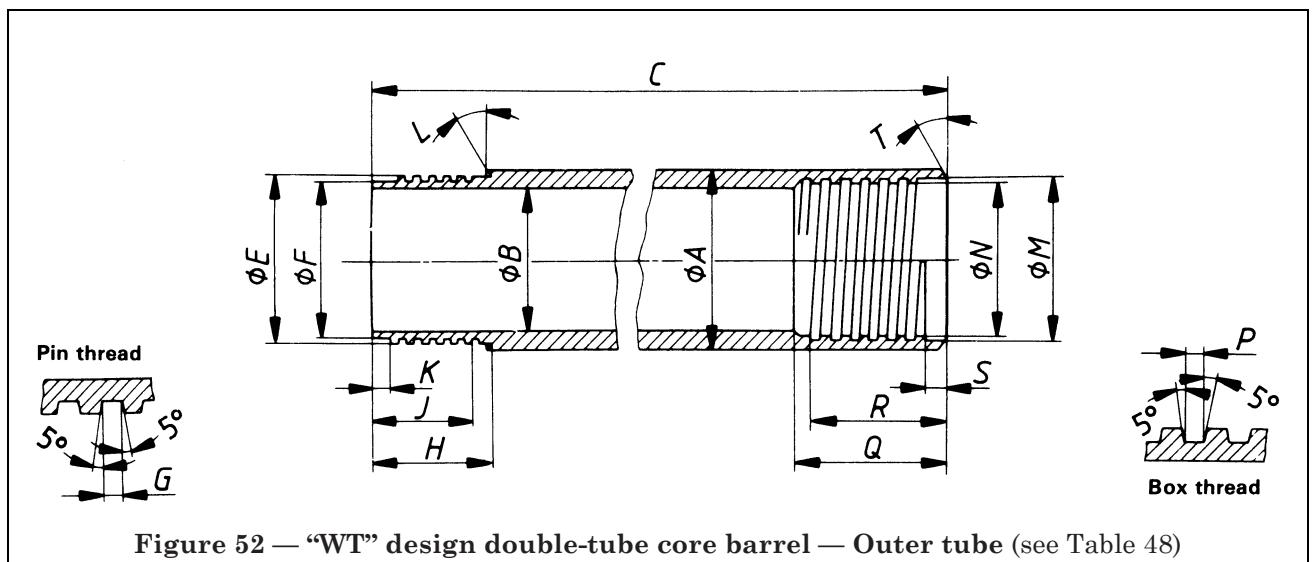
“WT” design double-tube core barrel — Outer tube (see Table 48)
